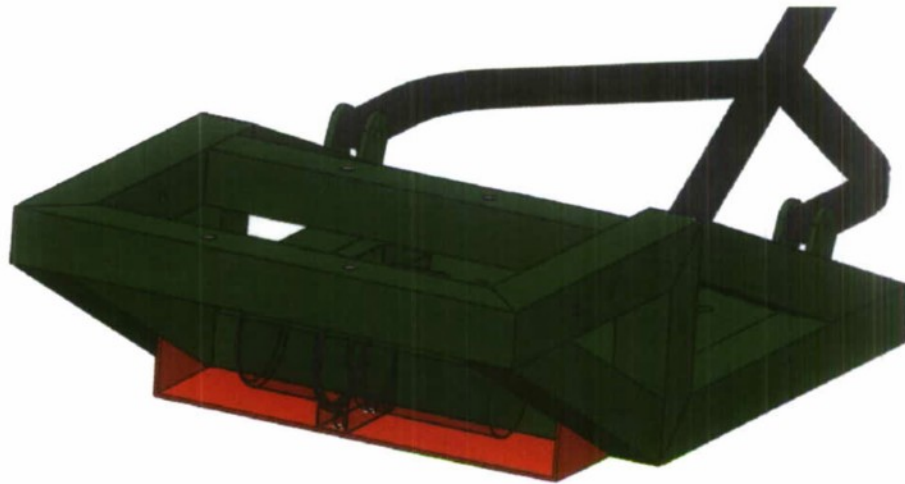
Hydraulic power unit mount that attaches the hydraulic power unit to the frame.
